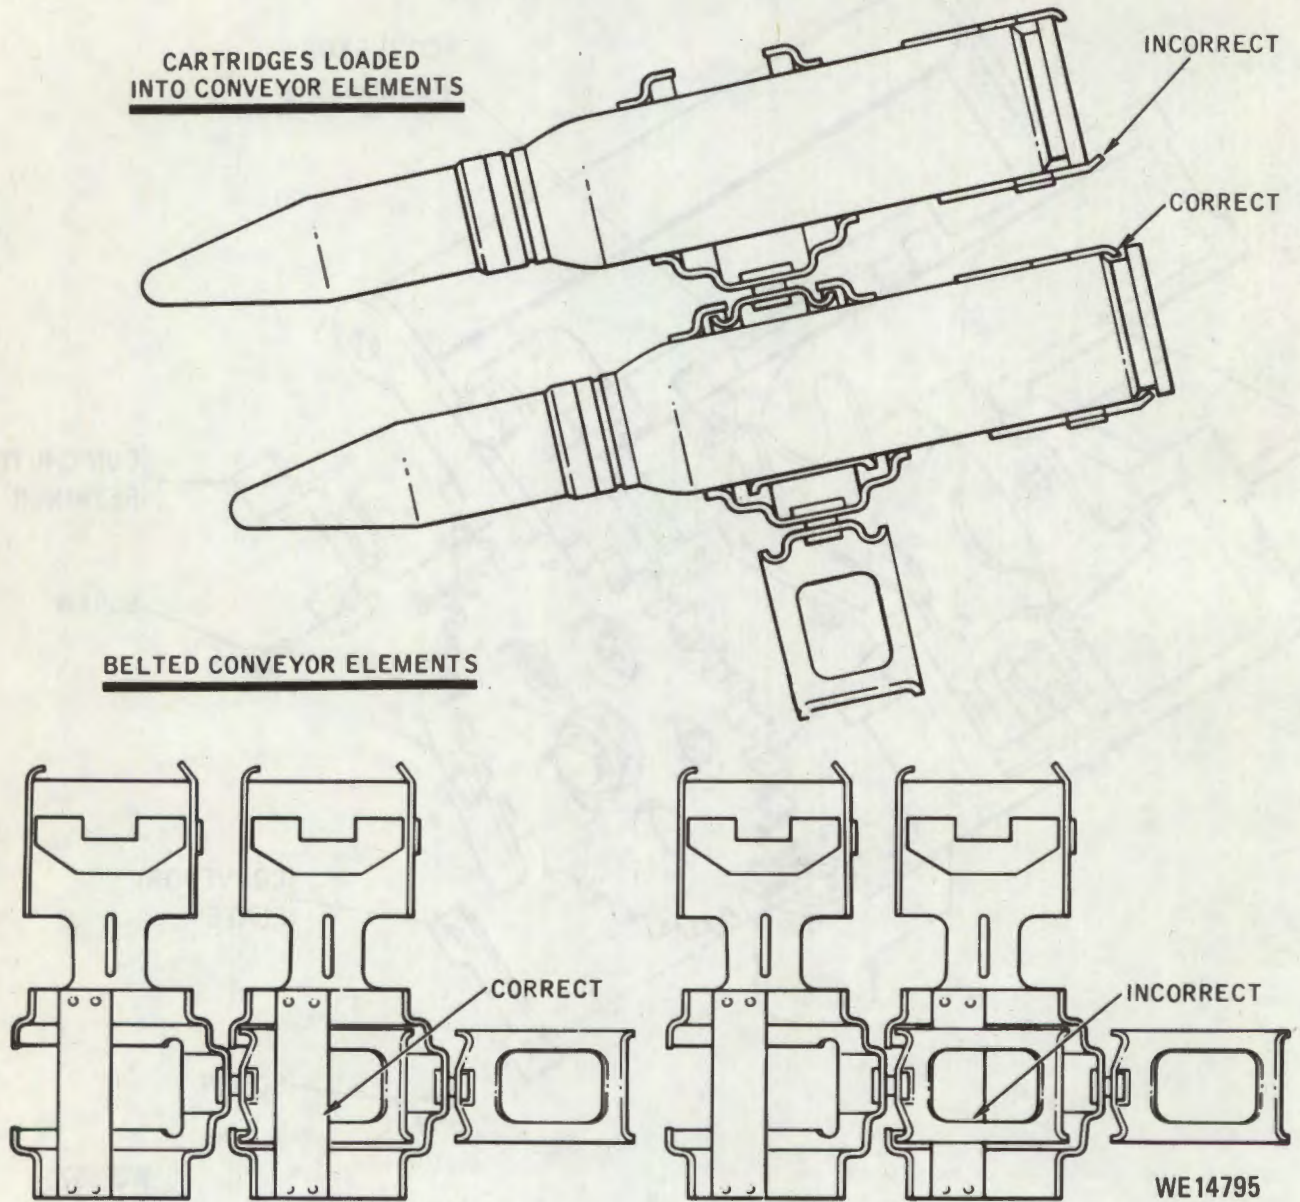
Conveyor elements and rounds, correct and incorrect assembly.
